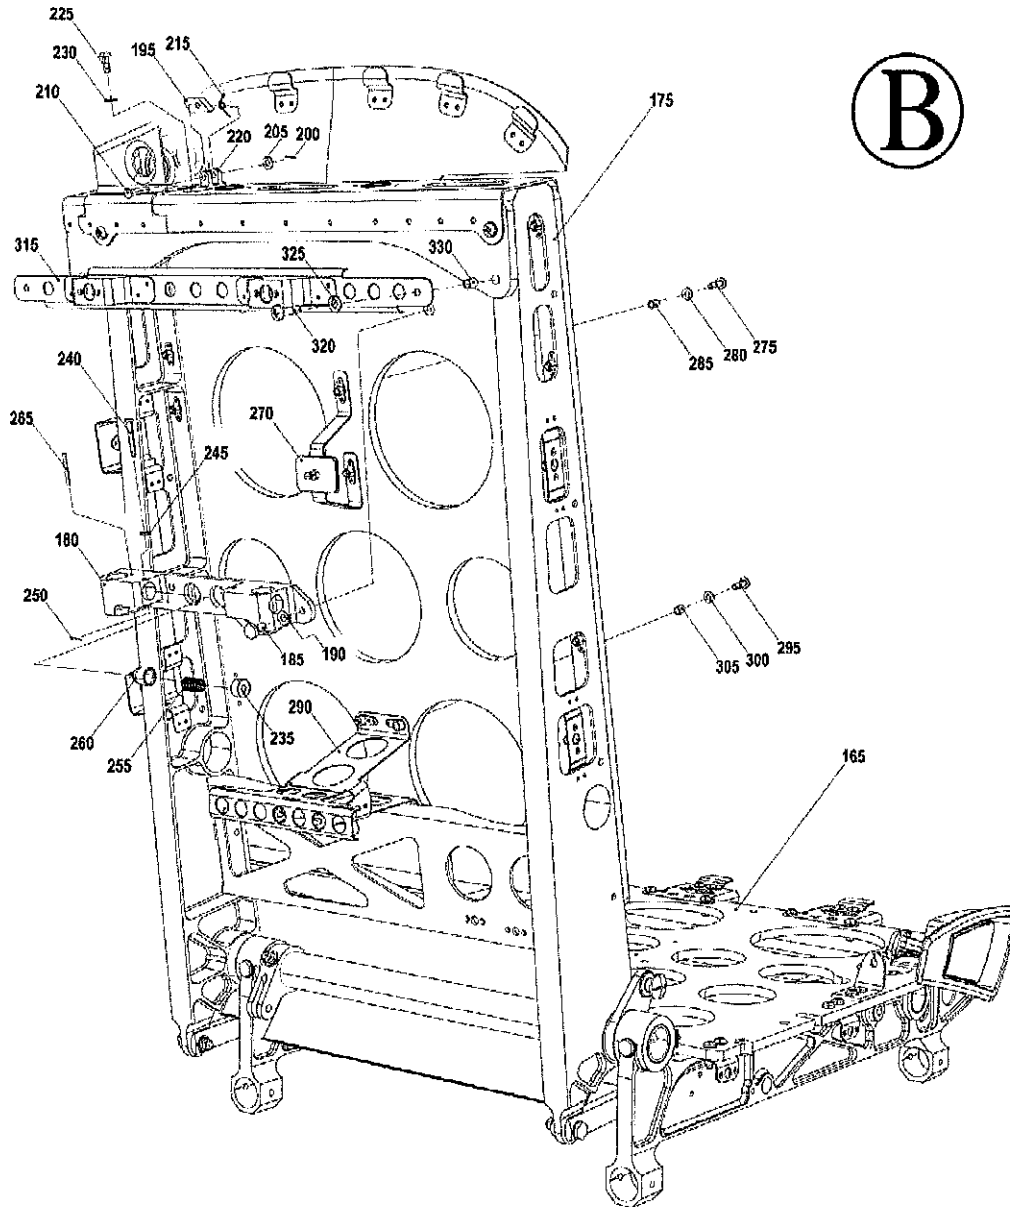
SHEET 3 UPPER SEAT ASSEMBLY
